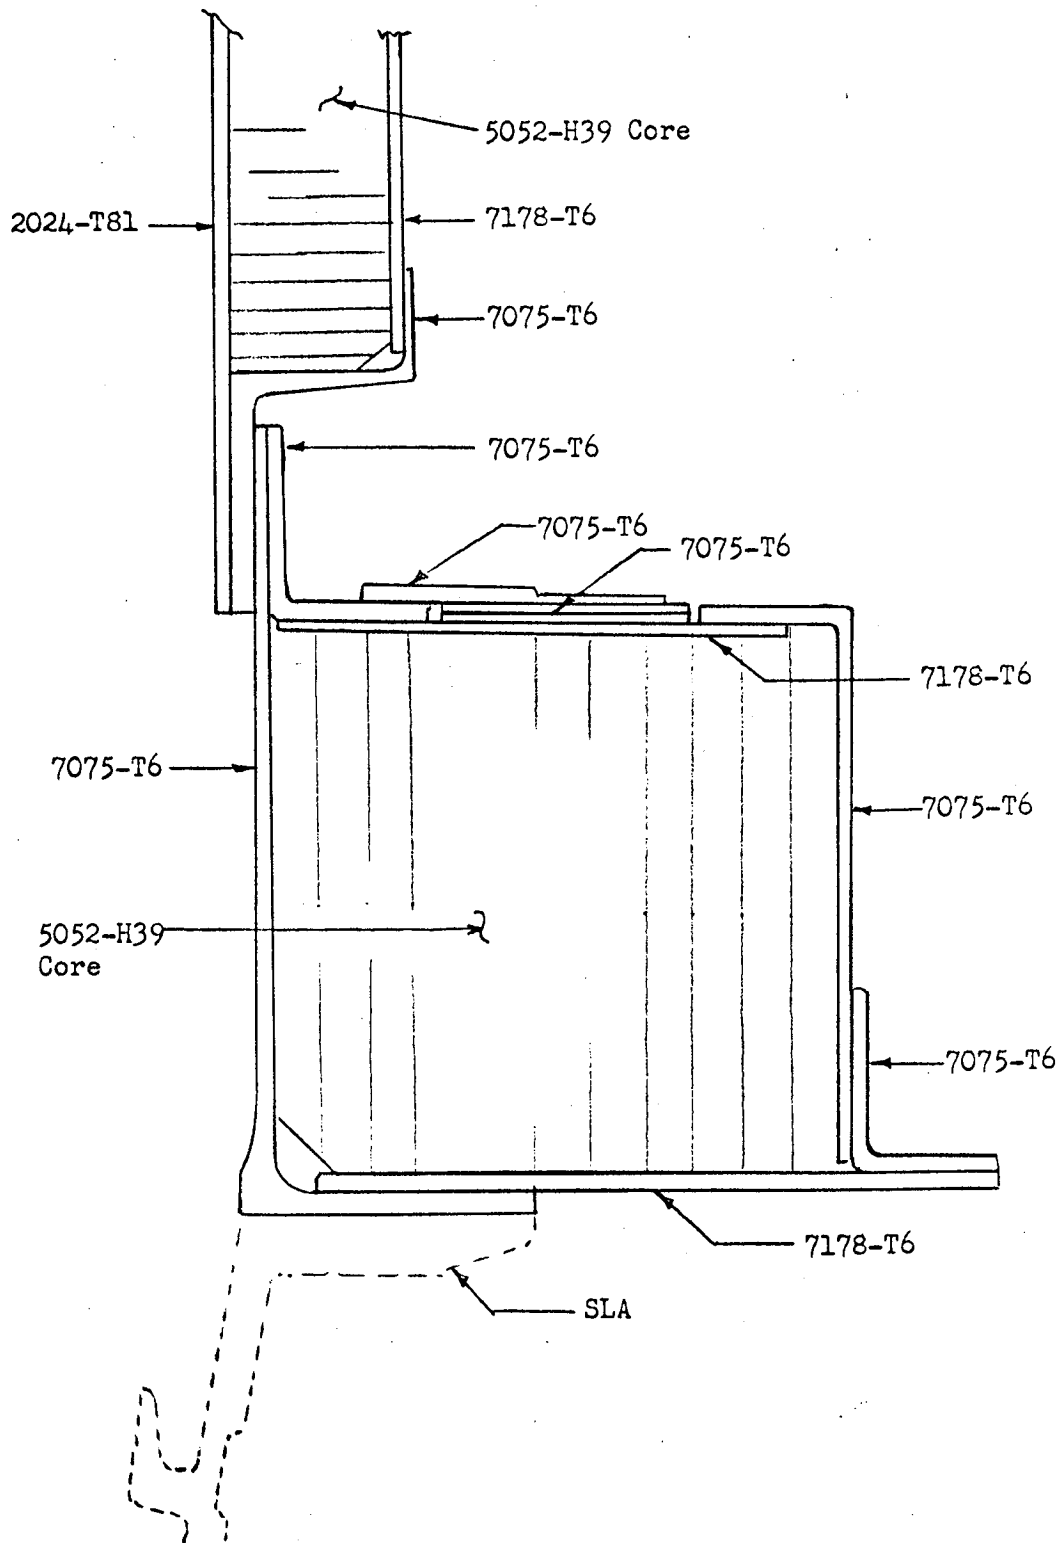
TYPICAL MATERIAL USAGE, AFT BULKHEAD - OUTER SHELL PANEL JOINT AREA (FASTENERS NOT SHOWN)
